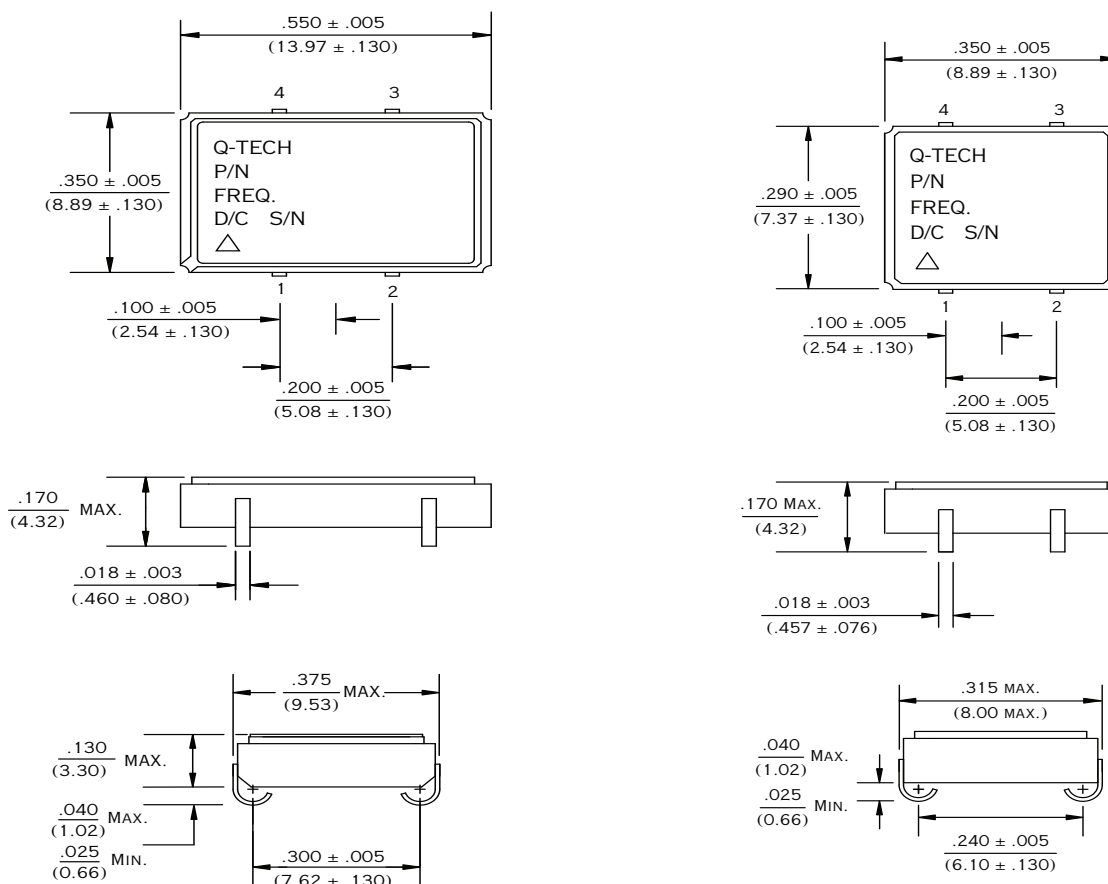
QT782 and QT787 Package Drawing and Pin Outputs
